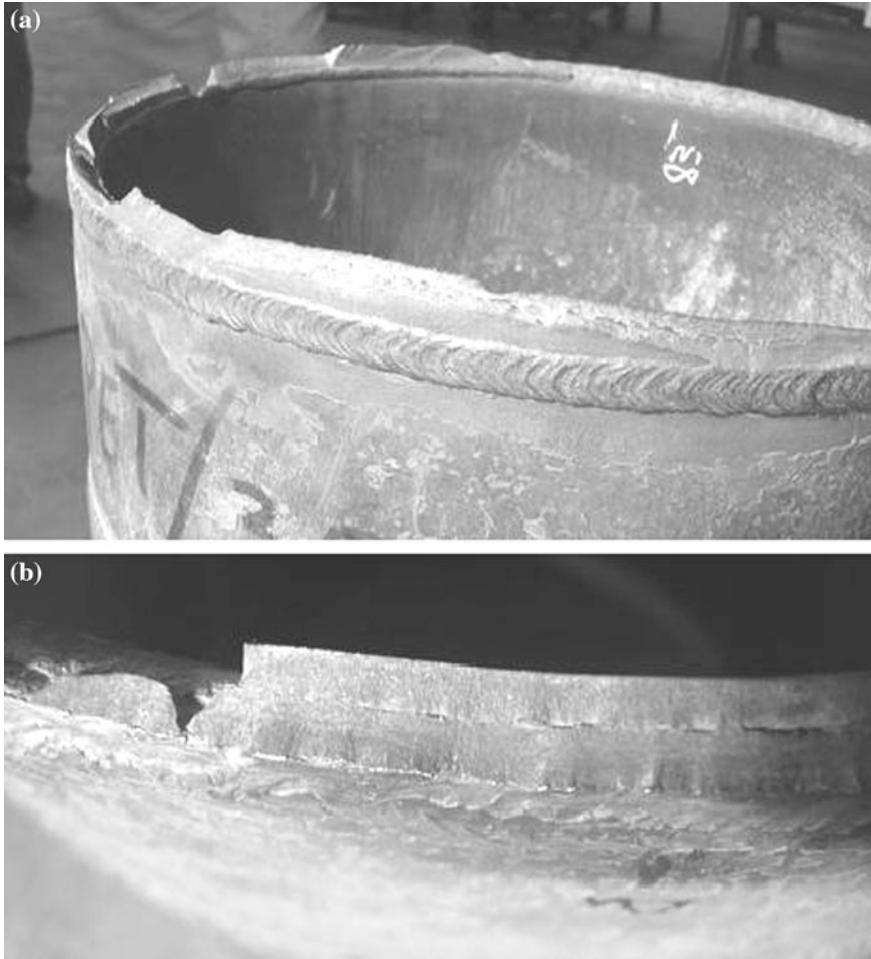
“Chevrons” in a brittle fracture, and shear lips near plate surfaces
